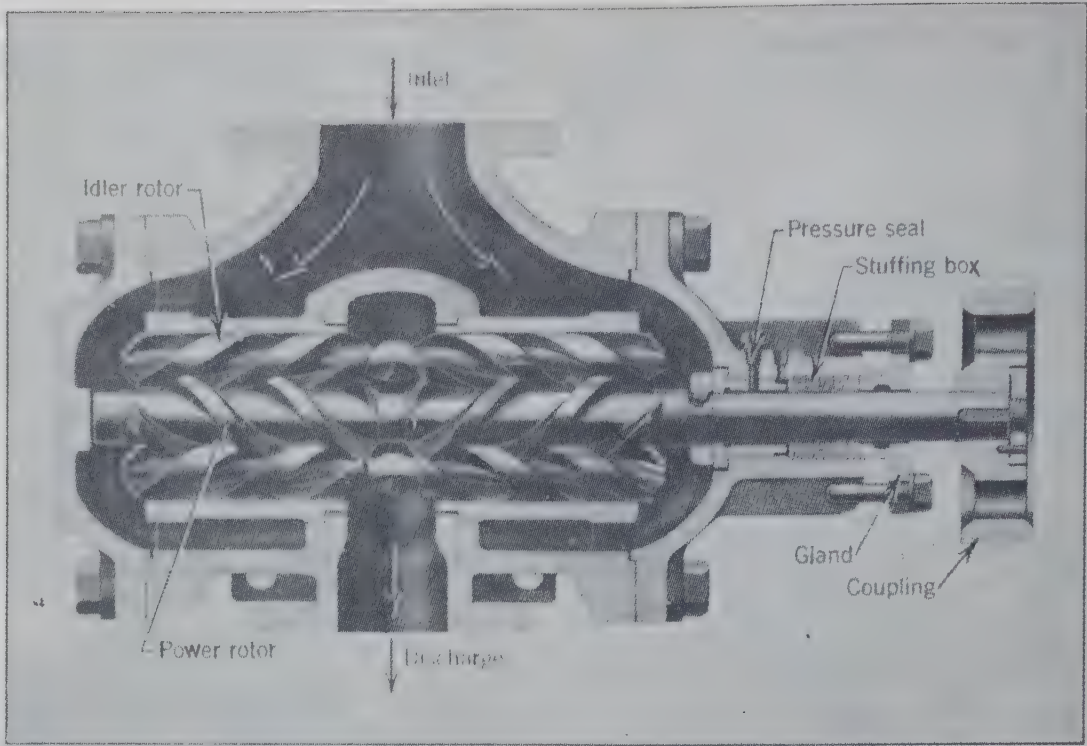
Cutaway view of screw pump. (De Laval Steam Turbine Co.)
